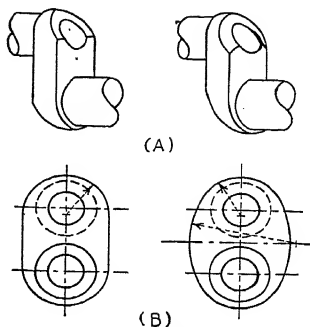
Crank arm details for noncounterweighted in-line and V-type aircraft-engine crankshafts. (A) Methods used in chamfering engine crankshaft arms. (B) Typical crank-arm contours. (From Angle, "Engine Dynamics and Crankshaft Design.")
